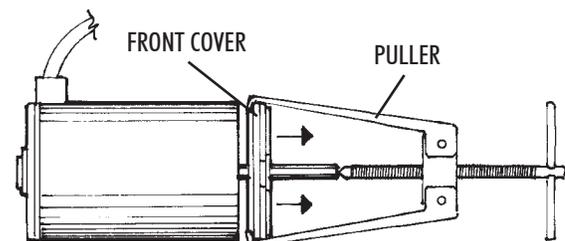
Using a bearing puller to remove the motor front cover and bearing
